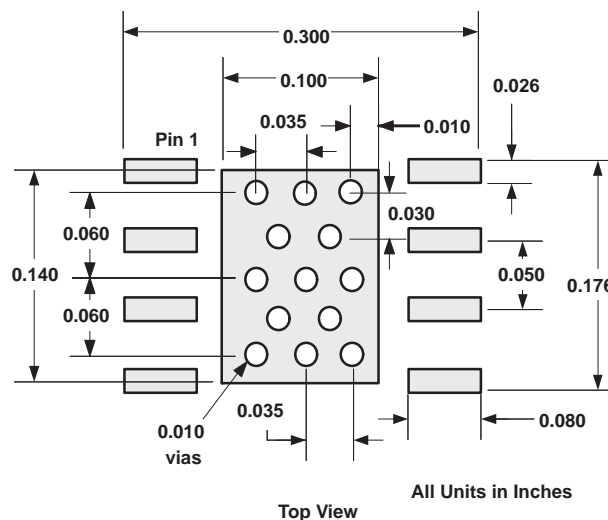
DDA PowerPAD PCB Etch and Via Pattern
